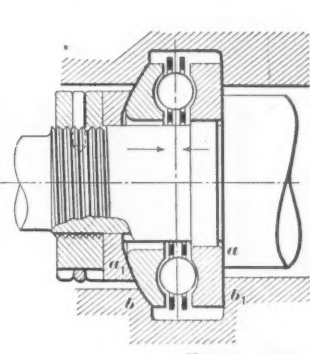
Thrust Load in Two Directions on One Collar Bearing.
